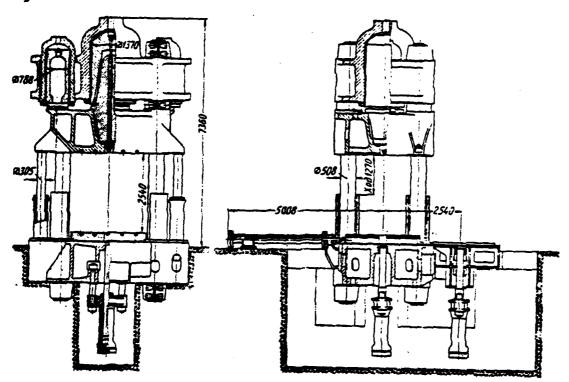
Three-cylinder hydraulic stamping machine by effort/force 5000 t.
